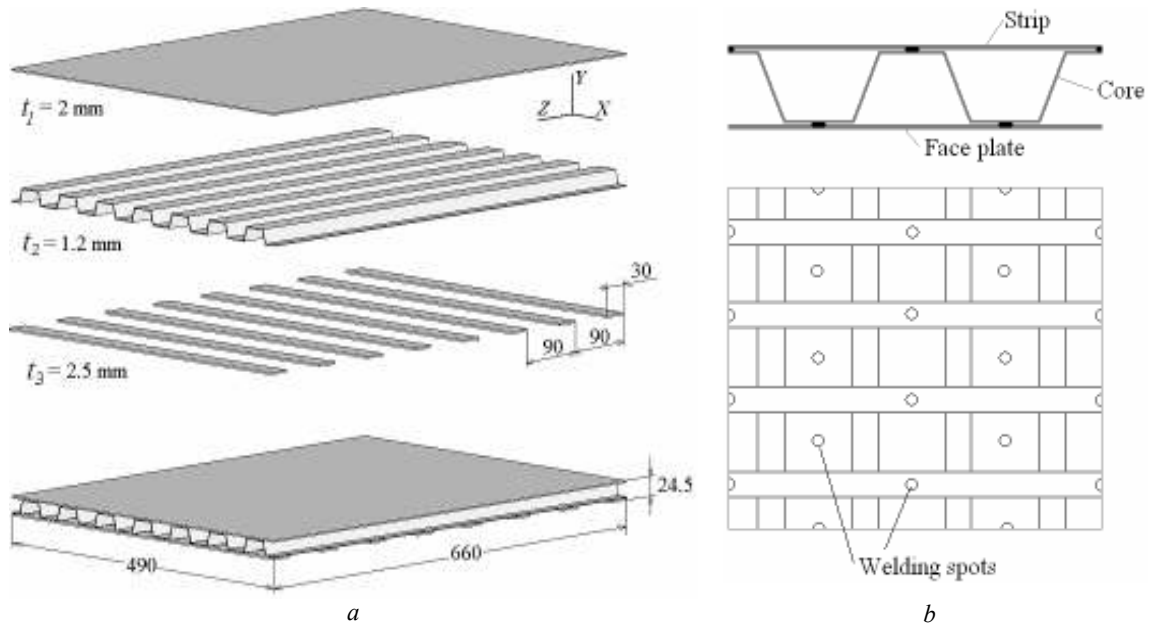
Lightweight panel from steel components before and after assembling by spot welding
